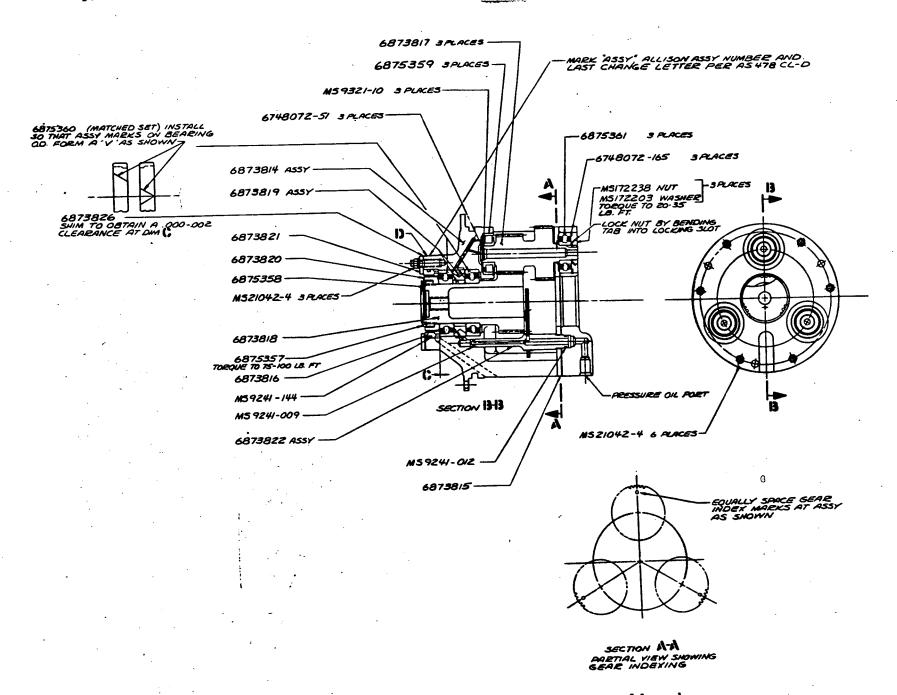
Cross section of layshaft gear and bearing support housing assembly.
